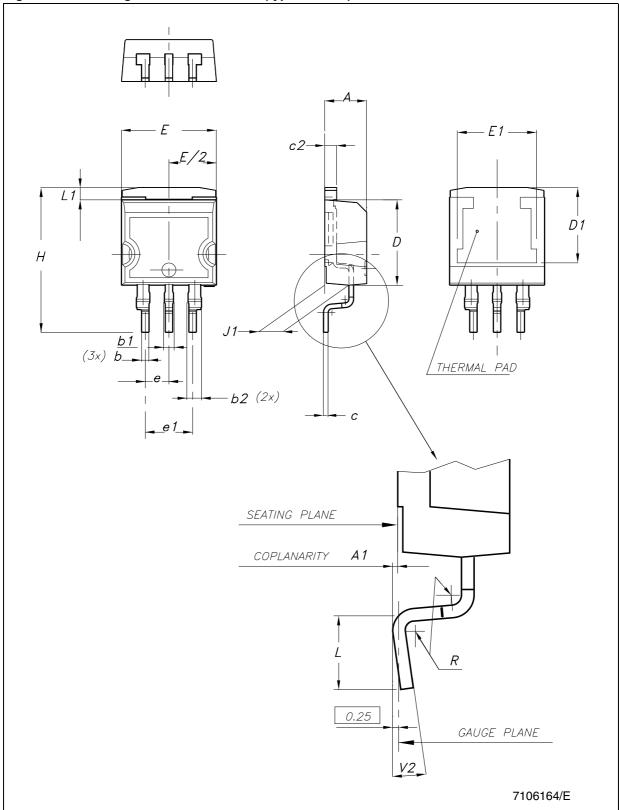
Drawing dimension D²PAK/A (type STD-ST)
